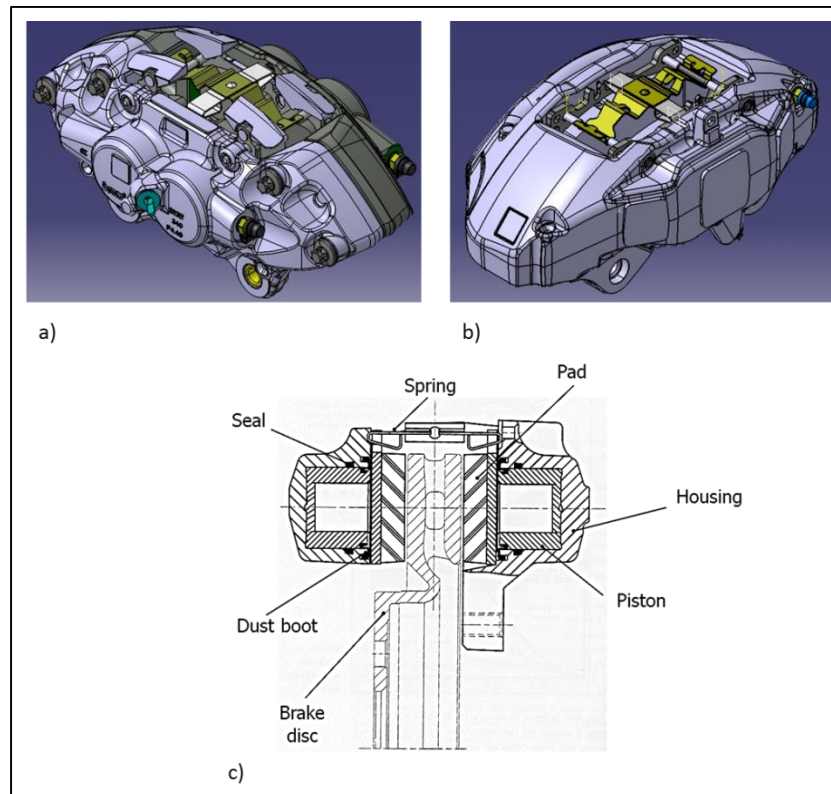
a) Two-piece and b) monobloc fixed caliper; c) section view of fixed caliper. (Courtesy of Brembo S.p.A.)
